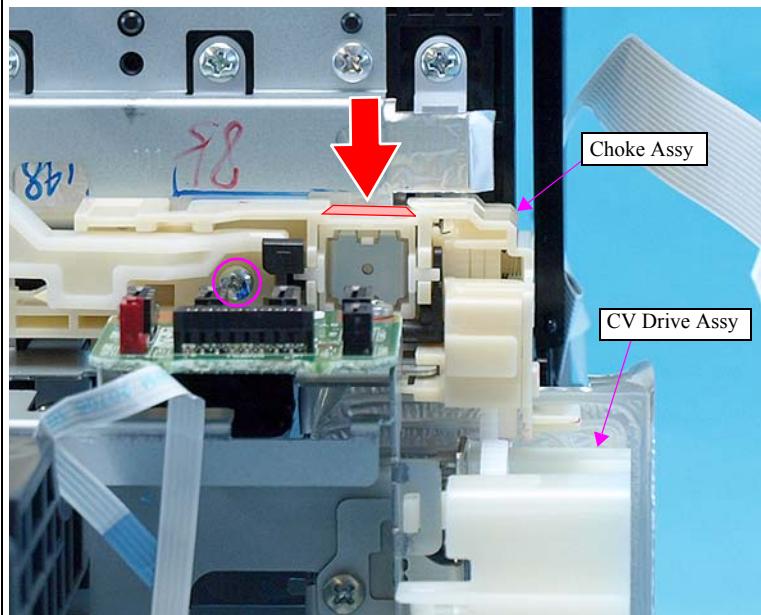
Adjusting the Attachment Location of the Choke Assy
